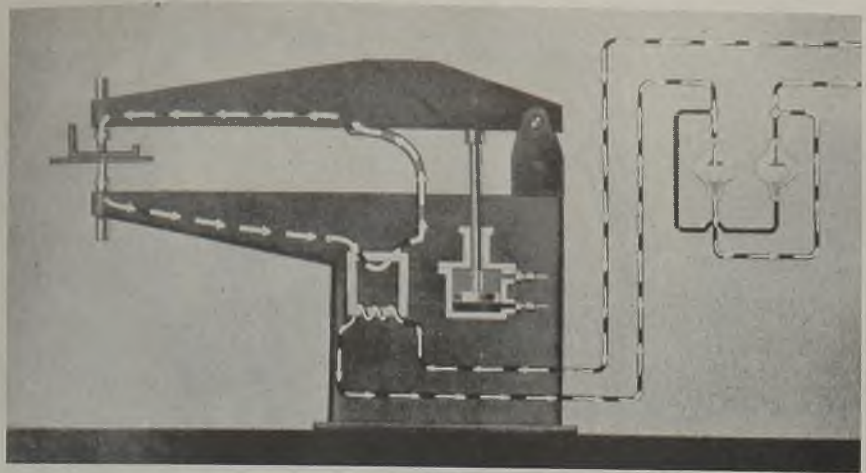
Schematic diagram of an alternating current rocker-arm spot-welding machine. Shown are pressure mechanism and electronic tubes for current timing in primary circuit. Transformer secondary delivers high-amperage low-voltage alternating current for welding
